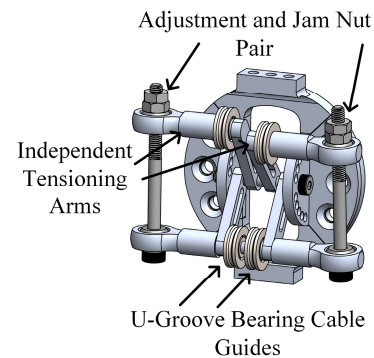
TAIL ACTUATION ASSEMBLY
